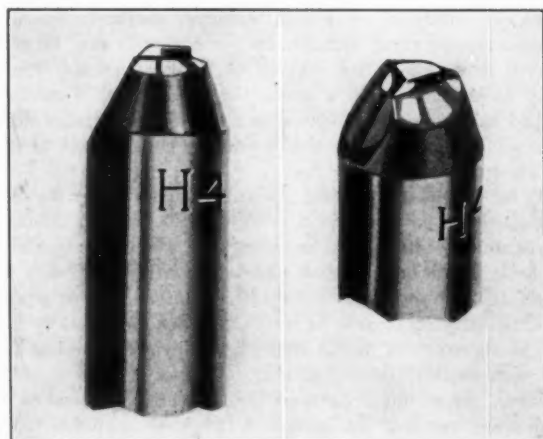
TOP AND PERSPECTIVE VIEWS OF REGULAR TURNING TOOL
